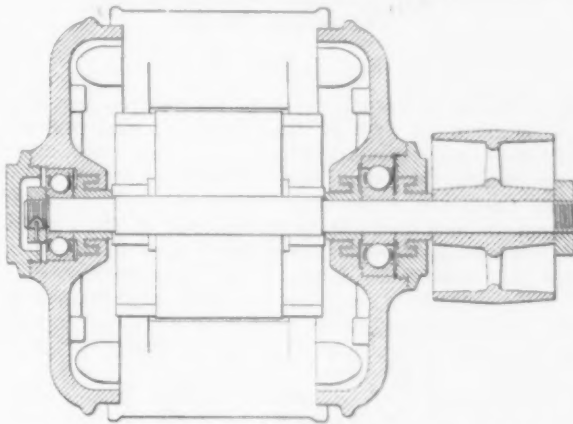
Ball Bearing Mounting Fitted with Labyrinth Type Grease Grooves
